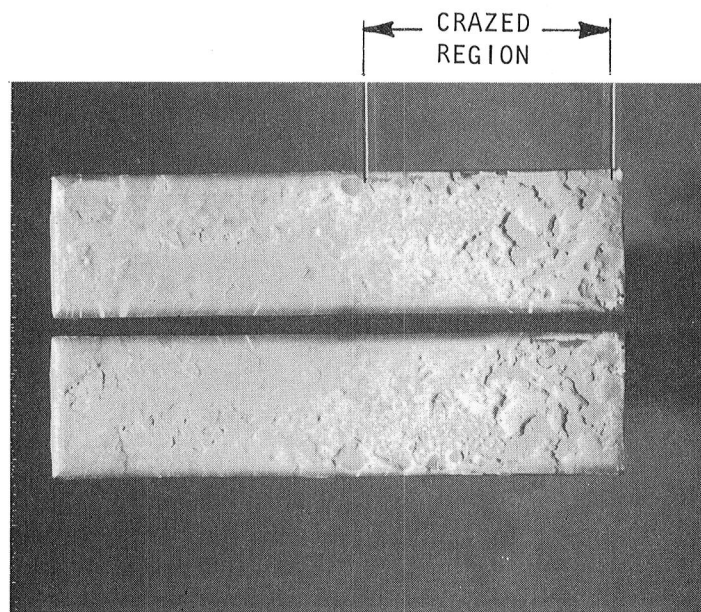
PHOTOGRAPH OF A TYPICAL FAILURE SURFACE
